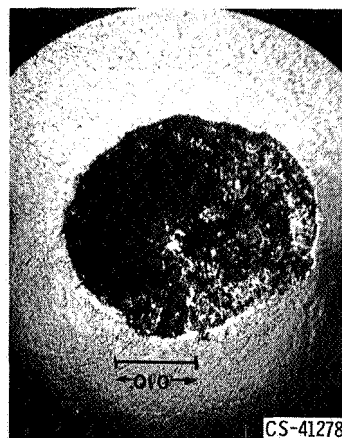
Surface damage to spherical pivot (titanium carbide - K 162B) for tilting pad bearing after operation in sodium.
